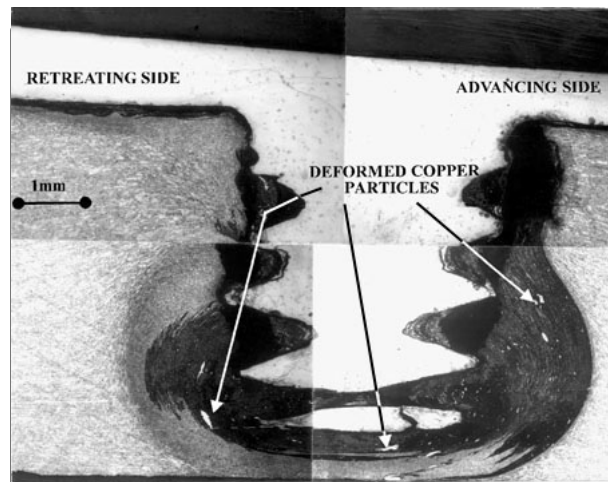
Weld showing the large vertical movement, with the Al2195 on top and the 6061 aluminum below, during welding (Guerra *et al.*, 2003).
